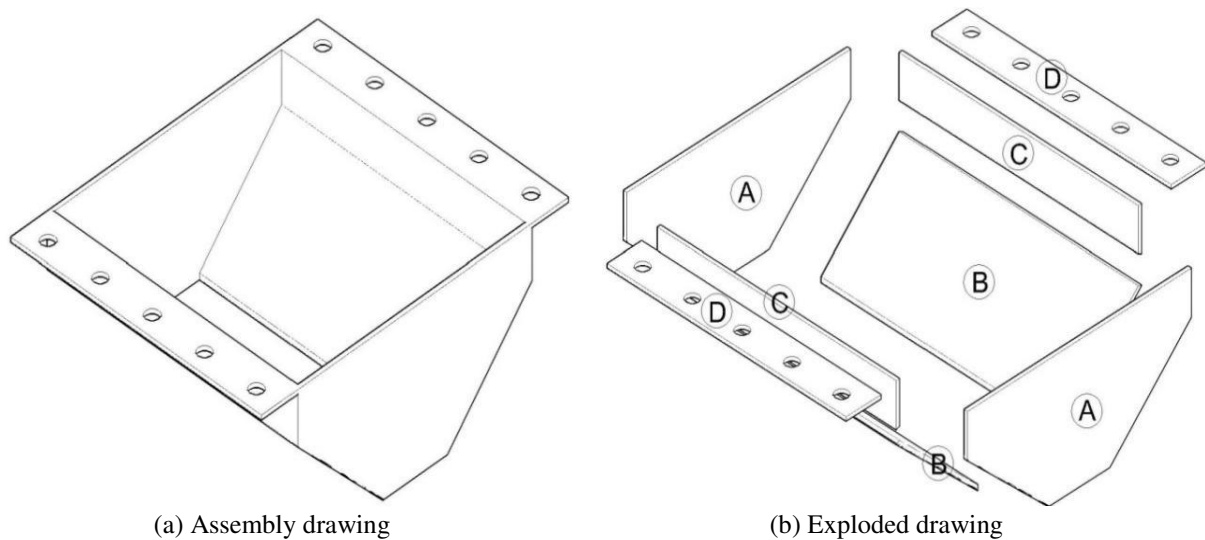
Assembly drawing (a) and exploded drawing (b) of the outlet chute.
